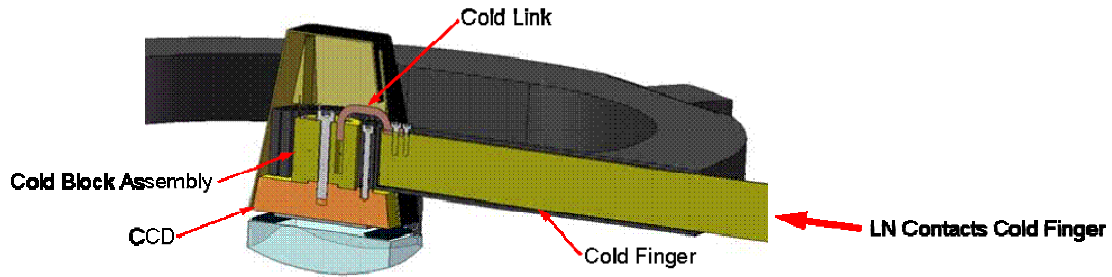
Cutaway view of spider assembly reveals thermal circuit components.
